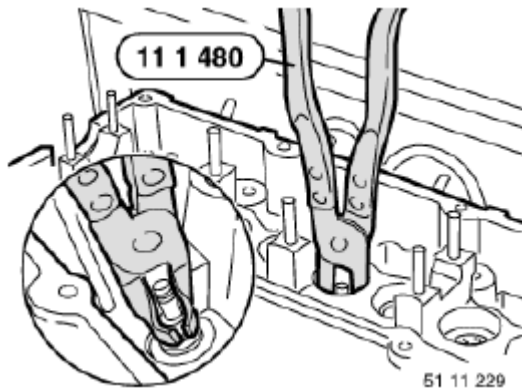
Detaching Valve Stem Seal From Valve Stem By Pulling Special Tool (11 1 480)
